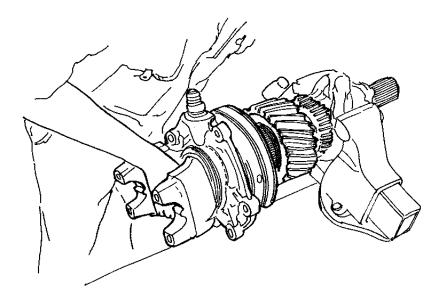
Remove Bearing Cage and Oil Pump Assembly
